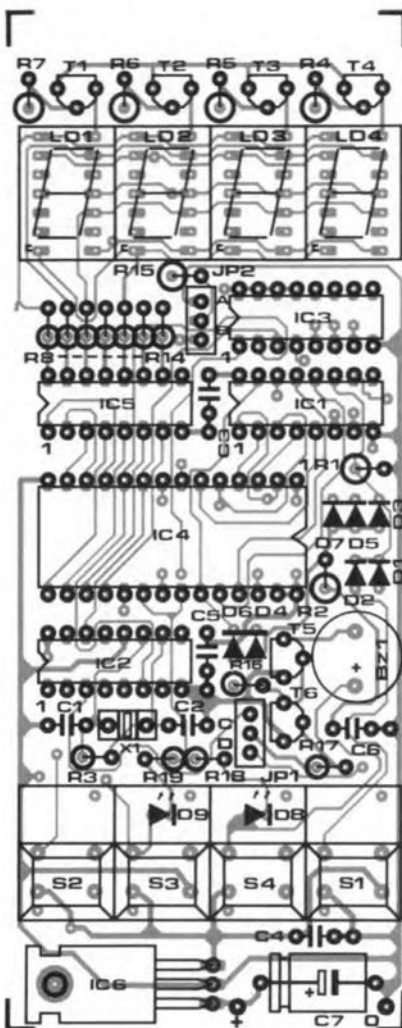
Printed-circuit board for the dark-room clock. The board is double-sided, but not through-plated.
